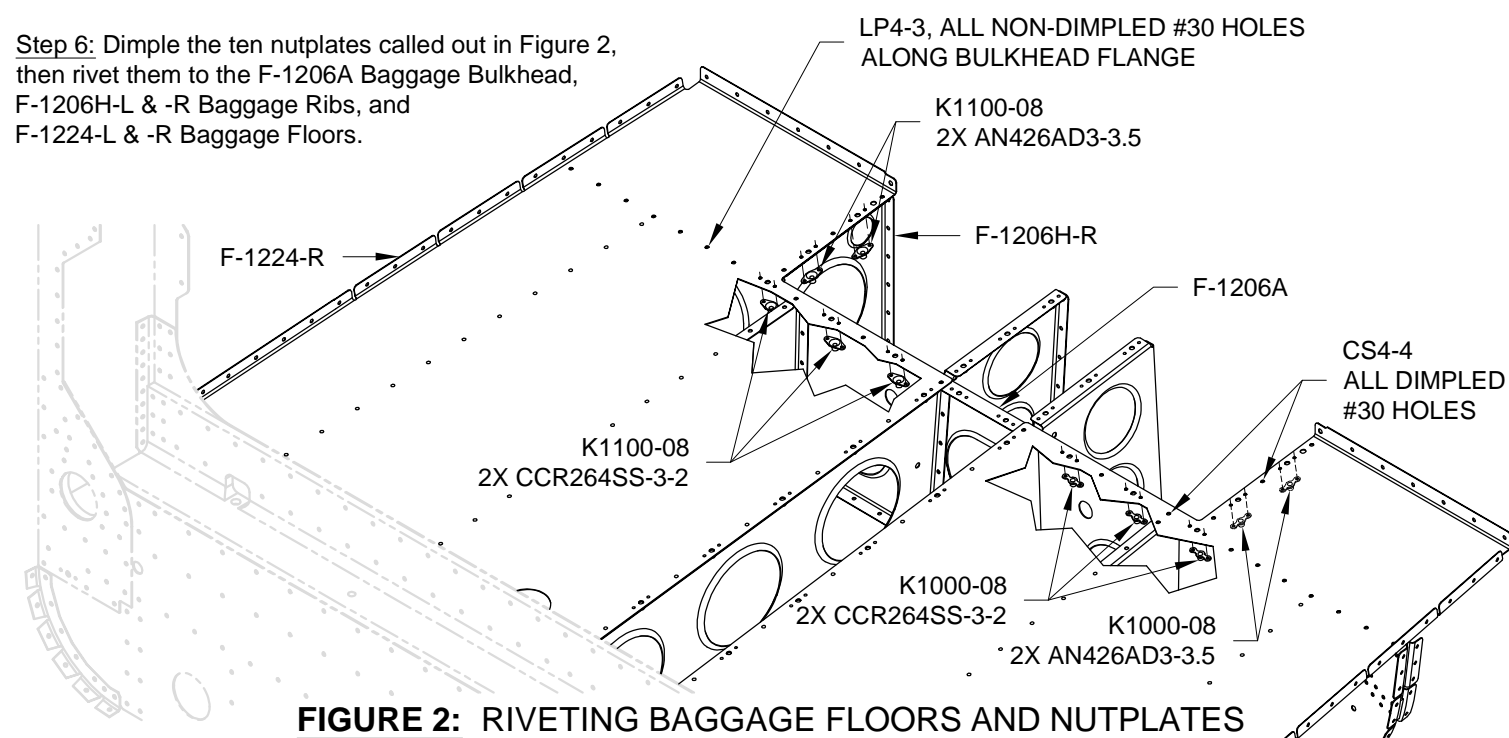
RIVETING BAGGAGE FLOORS AND NUTPLATES
